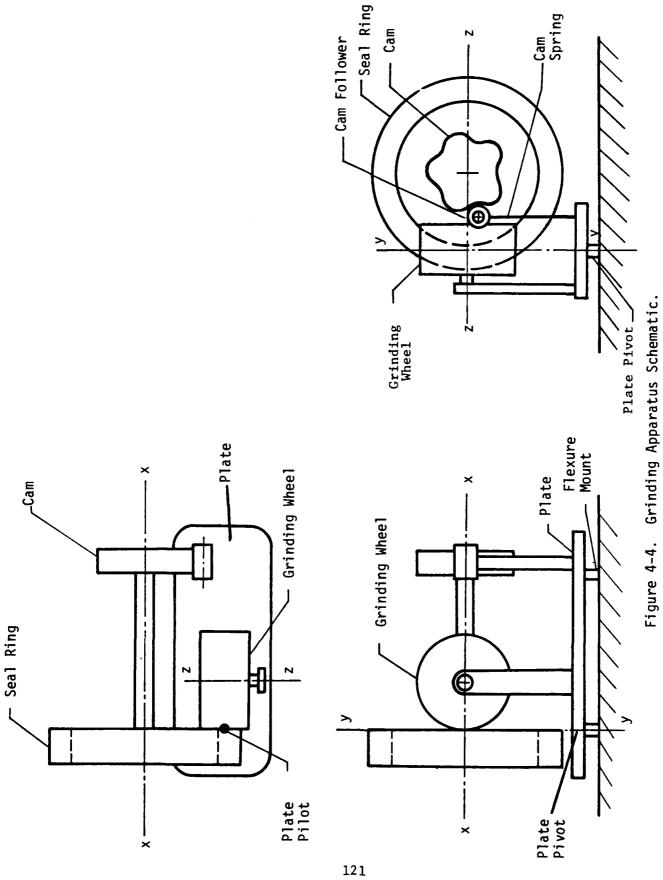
and 4-5 show the grinding apparatus. The seal ring is mounted in a fixture and very precisely rotated about x-x in a lathe. The cam shown also rotates with the ring. The grinding wheel and its driver and the cam follower are all mounted to a plate which pivots about the axis y-y. The plate is flexure mounted as shown later so is actually very stiff relative to the base. However forces in the z direction produced by the cam follower and spring cause the plate to rotate (on its flexure mounts) about axis y-y. Therefore as the seal ring and cam turn about axis x-x, the cam follower causes the grinding wheel and plate assembly to oscillate about axis y-y. With the grinding wheel running about axis z-z, this action causes the wave of Figure 4-1 to be ground into the seal ring. The cam used has nine waves to produce the nine wave seal ring. Axis y-y is located at the sealing dam radius so that the waviness at that radius is zero.
